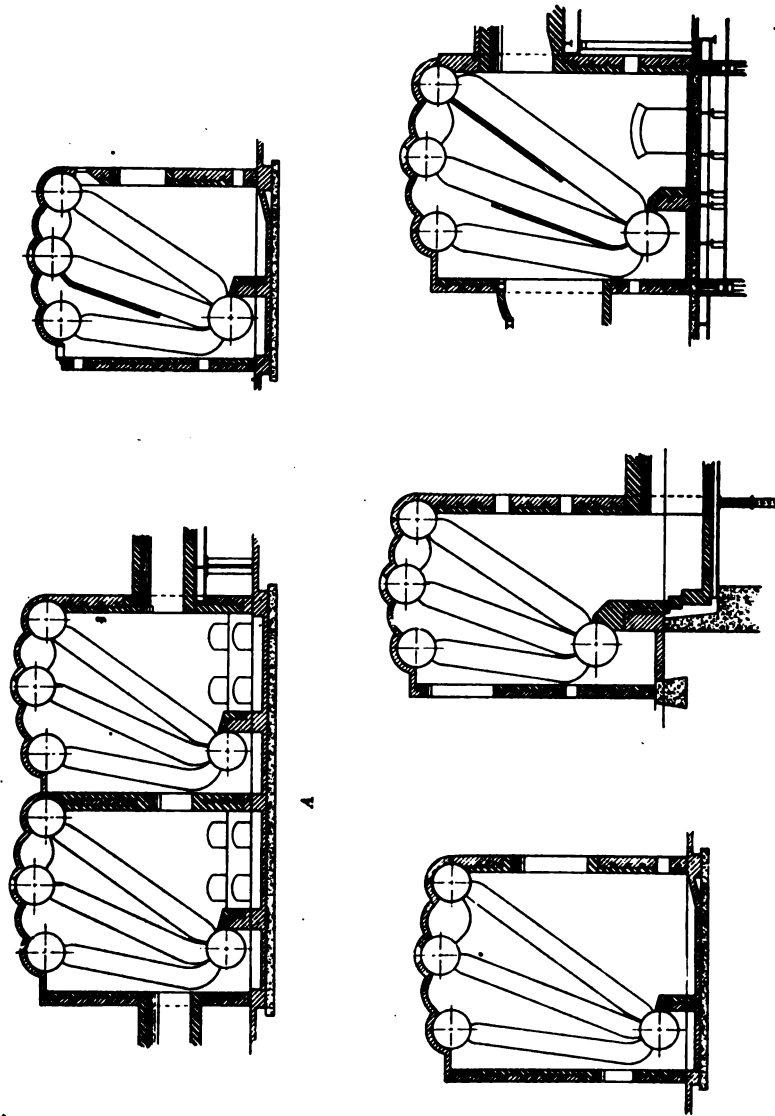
TYPICAL WASTE-HEAT BOILERS FOR COPPER FURNACES
